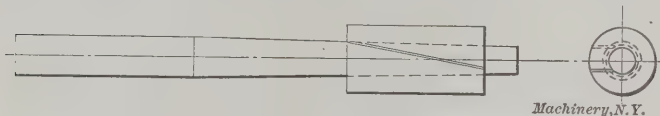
Design of Lap and Lap Arbors for Making Ring Gages
